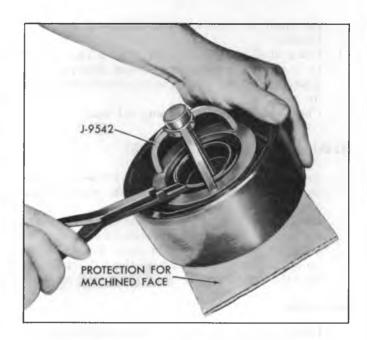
PG-Removing Clutch Spring Retainer Snap Ring
